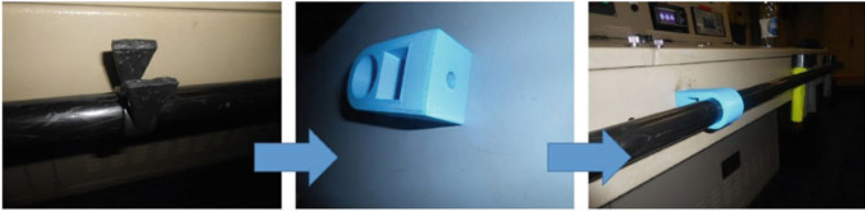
Rail bracket replacement, 3D printed and installed on board (Courtesy of Maersk Tankers and Green Ship of the Future)
